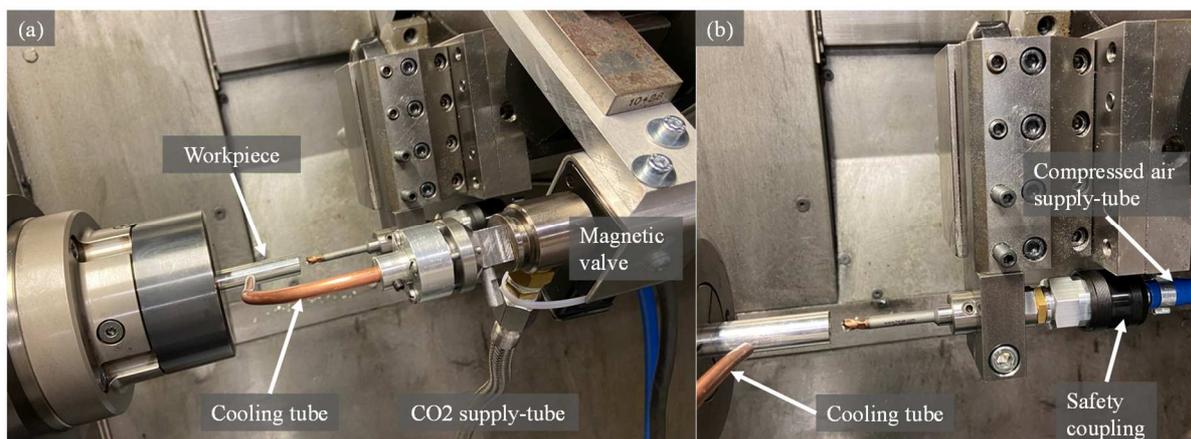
(a) C2 cooling configuration showing the cooling from the CO₂ supply-tube to the magnetic valve through the cooling tube to the workpiece surface; (b) Combination of workpiece side cooling via cooling tube (C2) and tool-side cooling via compressed air supply tube (C1)
